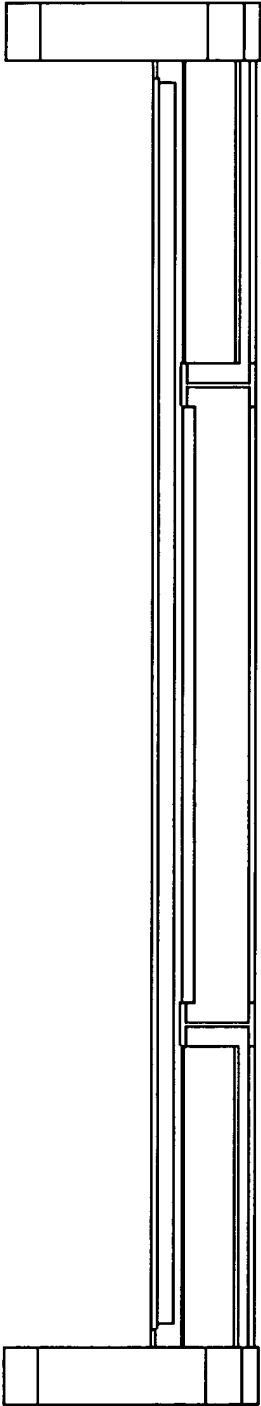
B: Left view of a floor frame (40 foot high cube collapsible cargo container)
